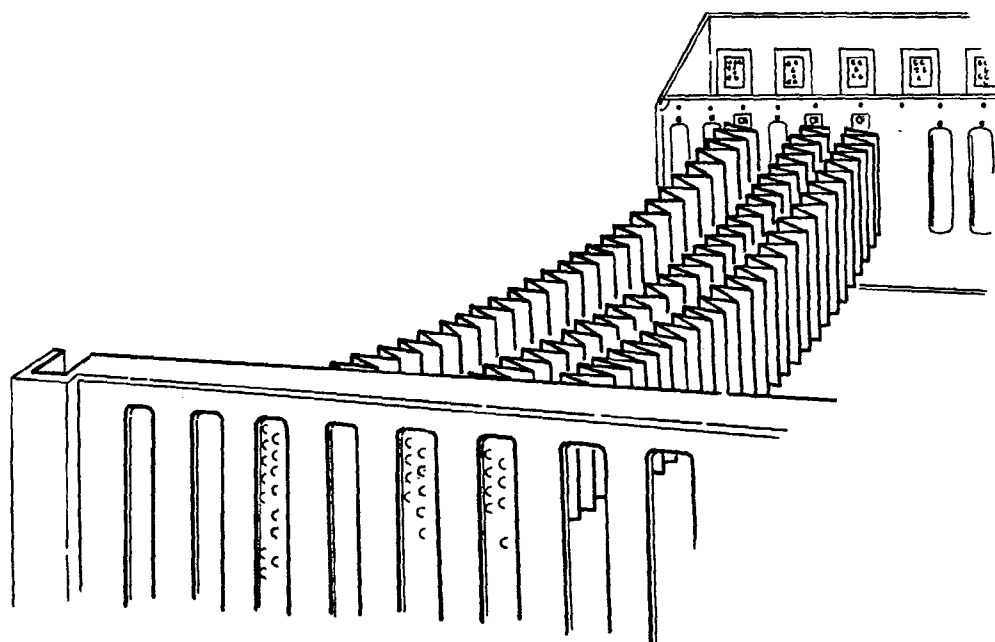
Retractable FCC rack-mounted drawer assembly.
